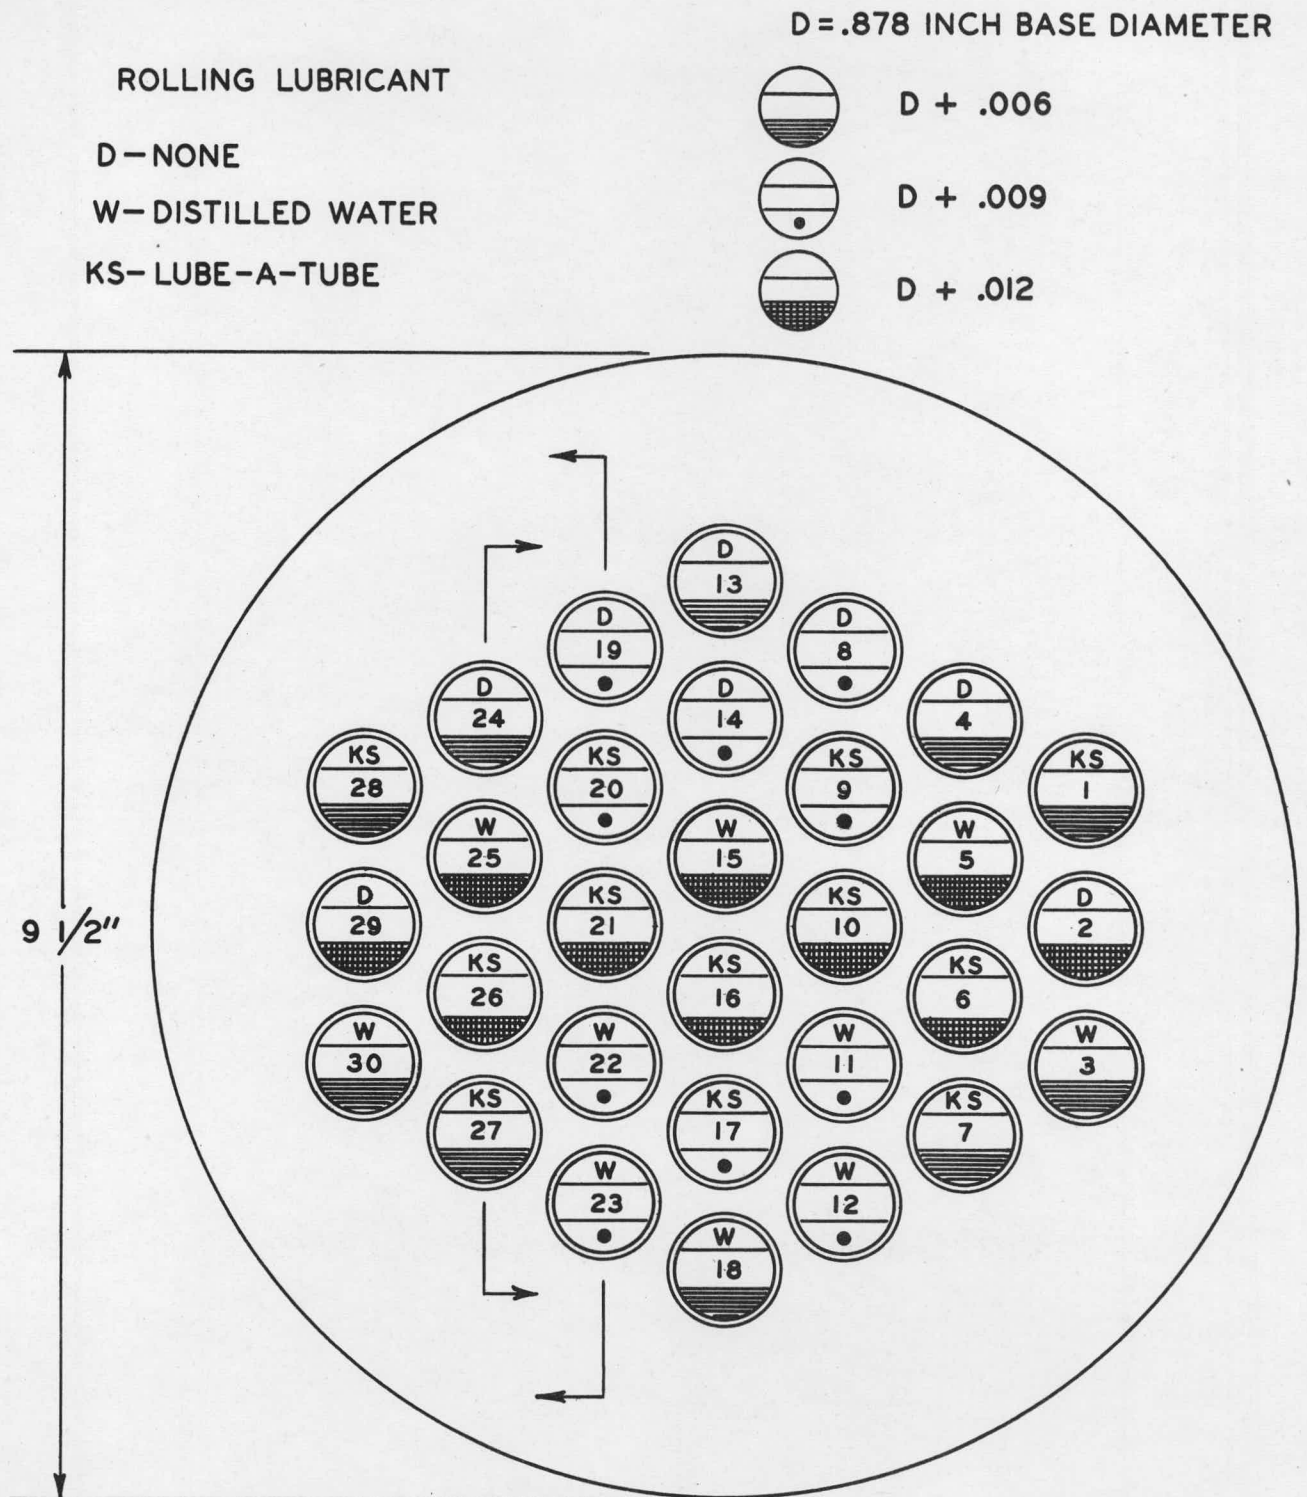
SCHEMATIC LAYOUT FOR TUBE ROLLING TEST UNIT NUMBER 1 (REFER TO TABLE I FOR DETAILS.)
